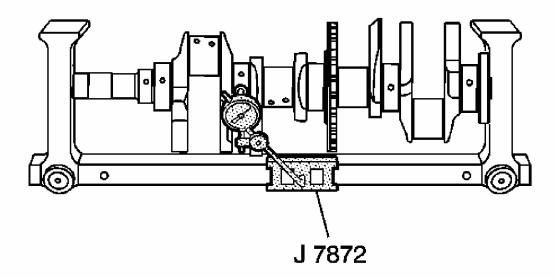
View Of J 7872 Measuring Crankshaft Runout Courtesy of GENERAL MOTORS CORP.
